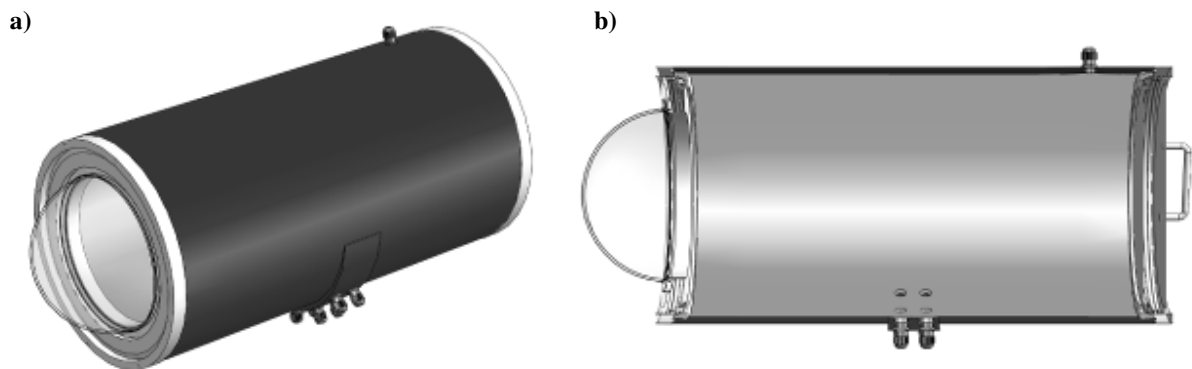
Final assembly of the AUV hull. a) 3D view. b) Cross-section.
